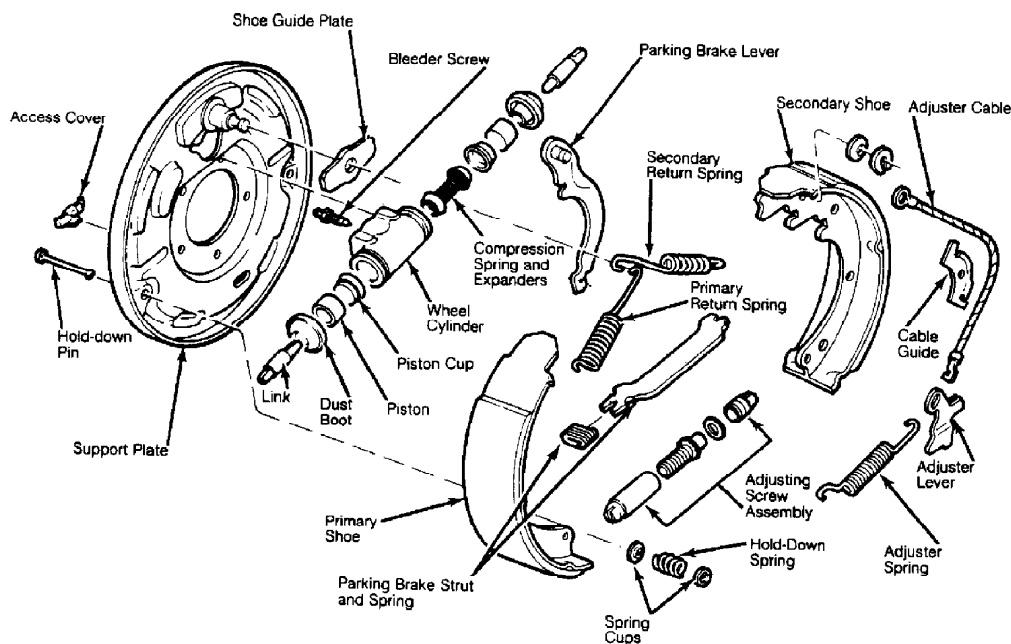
Exploded View of Drum Brake Assembly (Grand Wagoneer)
